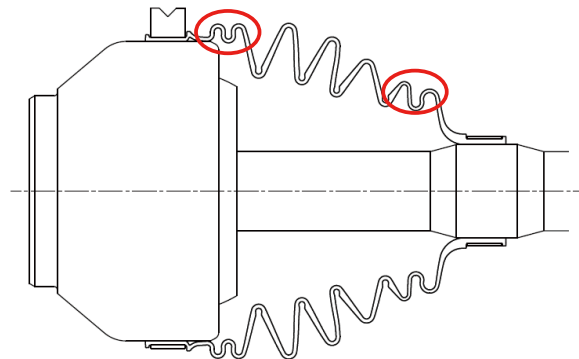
Sectional view of the boot (working angle: 0 degrees)
